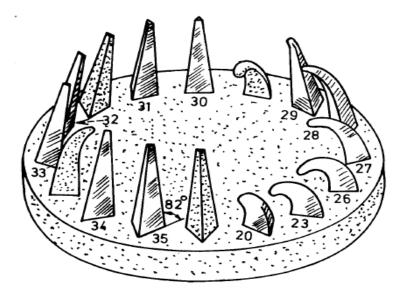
Method of Mounting Test Cone and Appearance After Testing.
